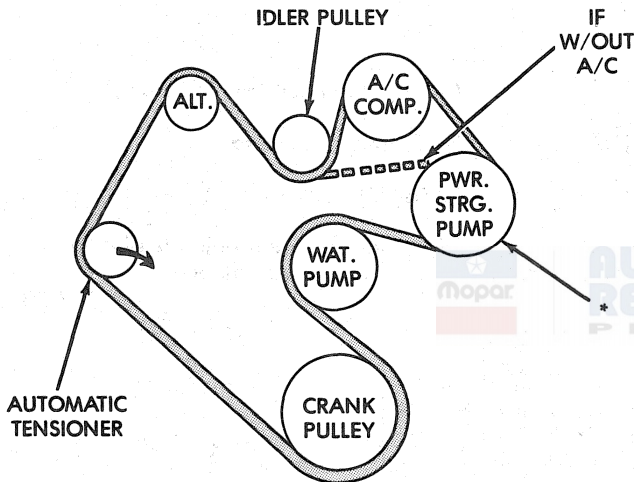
Belt Routing—Alternator and Power Steering—2.5L Engine
